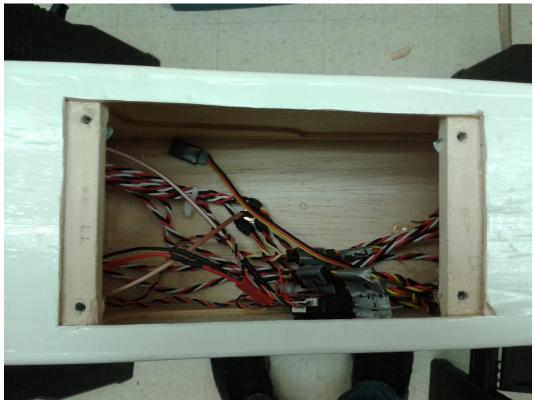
The aft hatch cutout in the back of the aircraft, allowing access to the servo extension wires. The wooden mounts and screw holes are again readily visible.
